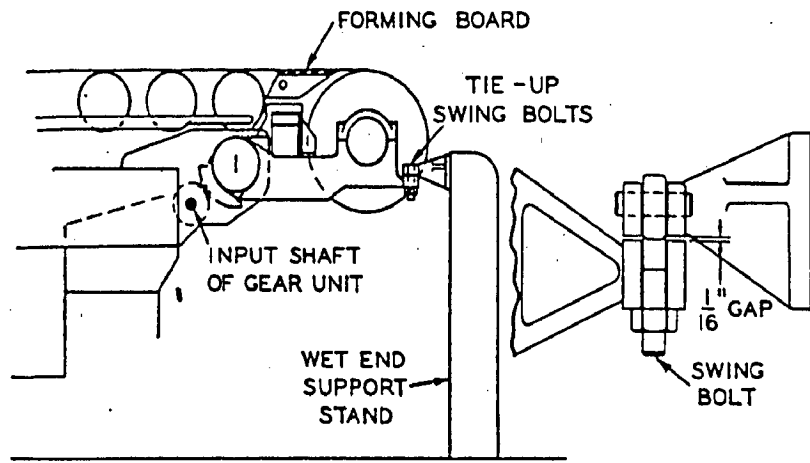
RAISING BREAST ROLL WITH GEAR UNIT
